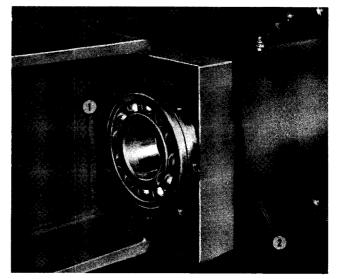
INNER AXLE BEARING 1. Bearing 2. Axle Housing
